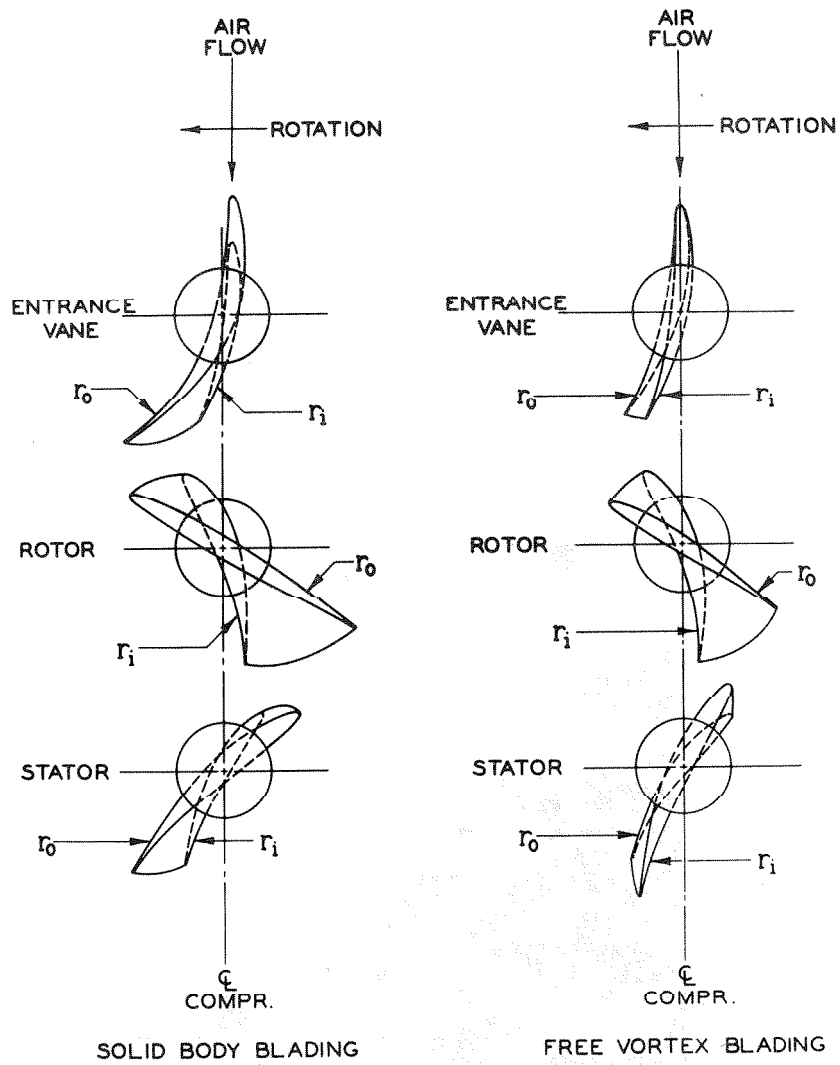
Root and Tip Sections of the Two Types of Compressor Blading
